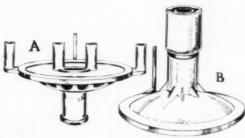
(above)—(A) Trunnion end casting for ball mill was bottom run with flow-off heads taken off the main flange and fed with one large head—yield, 70-72 per cent.
